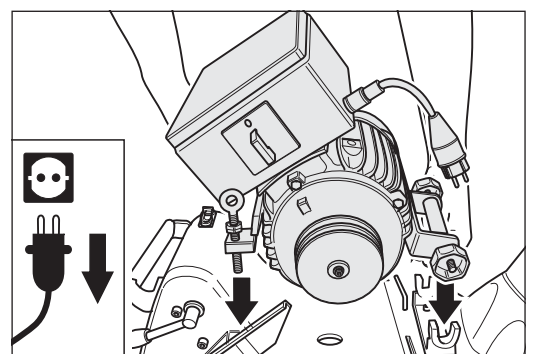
Put the motor into the motor bearing bracket. Similar to figure.
